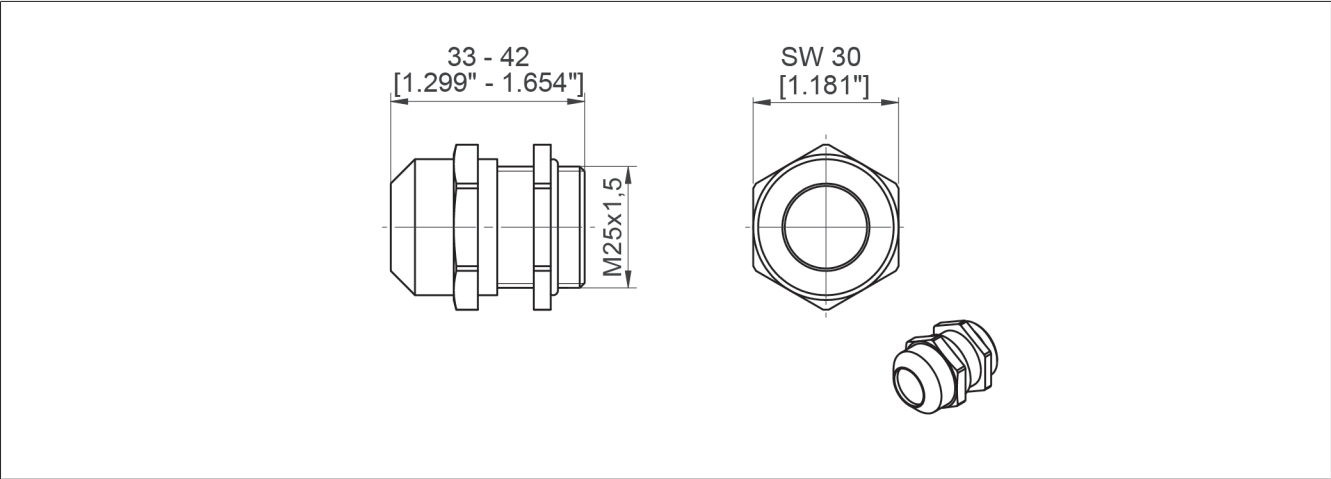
Offshore cable screw connection; material: stainless steel (V4A); clamping range 9...17 mm
